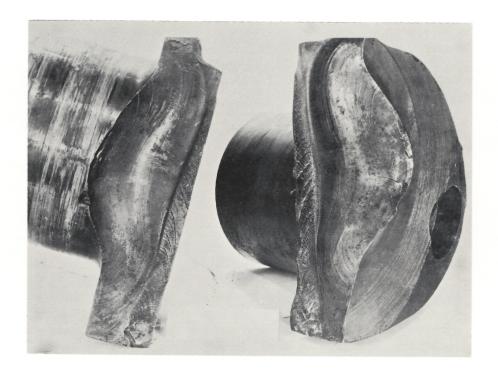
Bending Fatigue Failure of Diesel Engine Crankshaft Resulting from Service Induced Damage. Note that failure initiated at deep score or seizing marks in the crank
